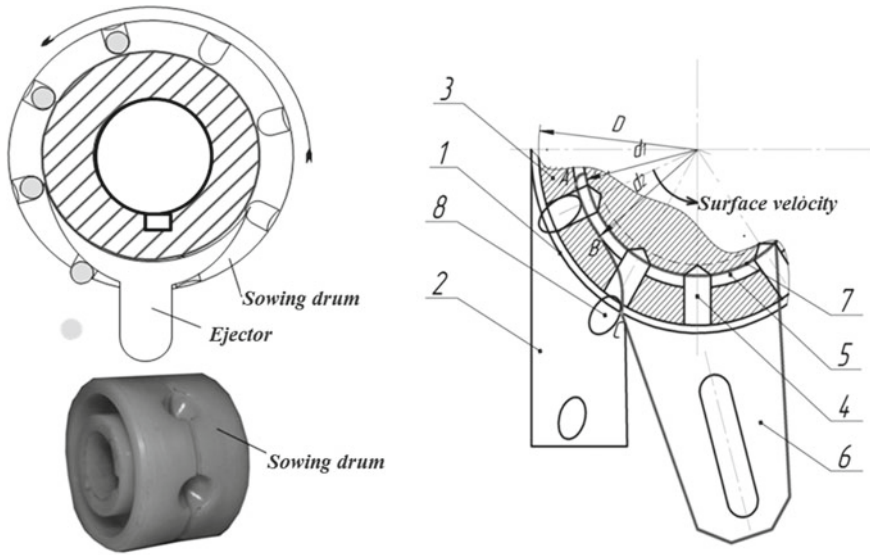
Principle of operation of the VPS 52/1 drum sowing unit with a passive ejector with brachistochronic curve BC: 1—body; 2—seed drill tube; 3—drum; 4—bore; 5—groove in the drum; 6—ejector; 7—support of the ejector; 8—seed
